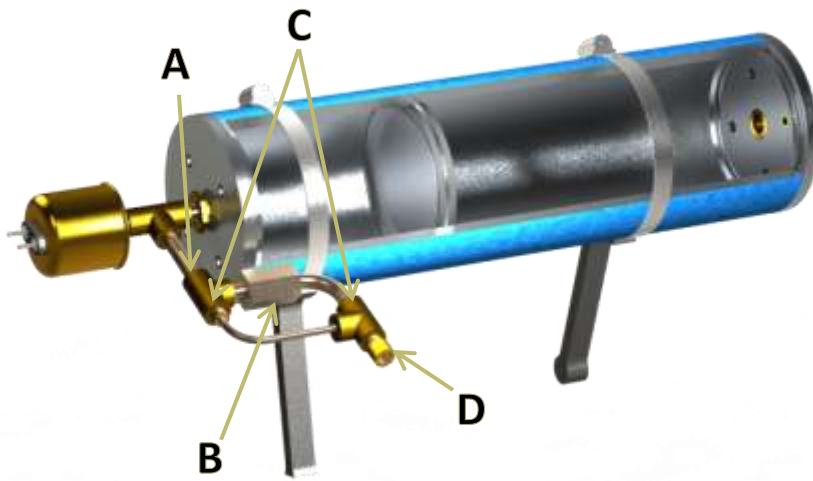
LUBRICATION COMPLETE ASSEMBLY
